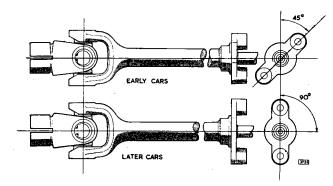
Showing the 45° and 90° phased lower steering columns
